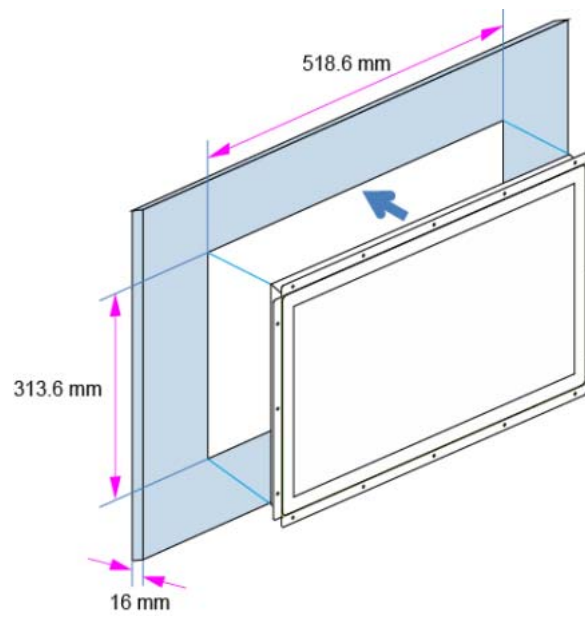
OPC-2152 Panel Mount Cut-out hole and maximum panel thickness
